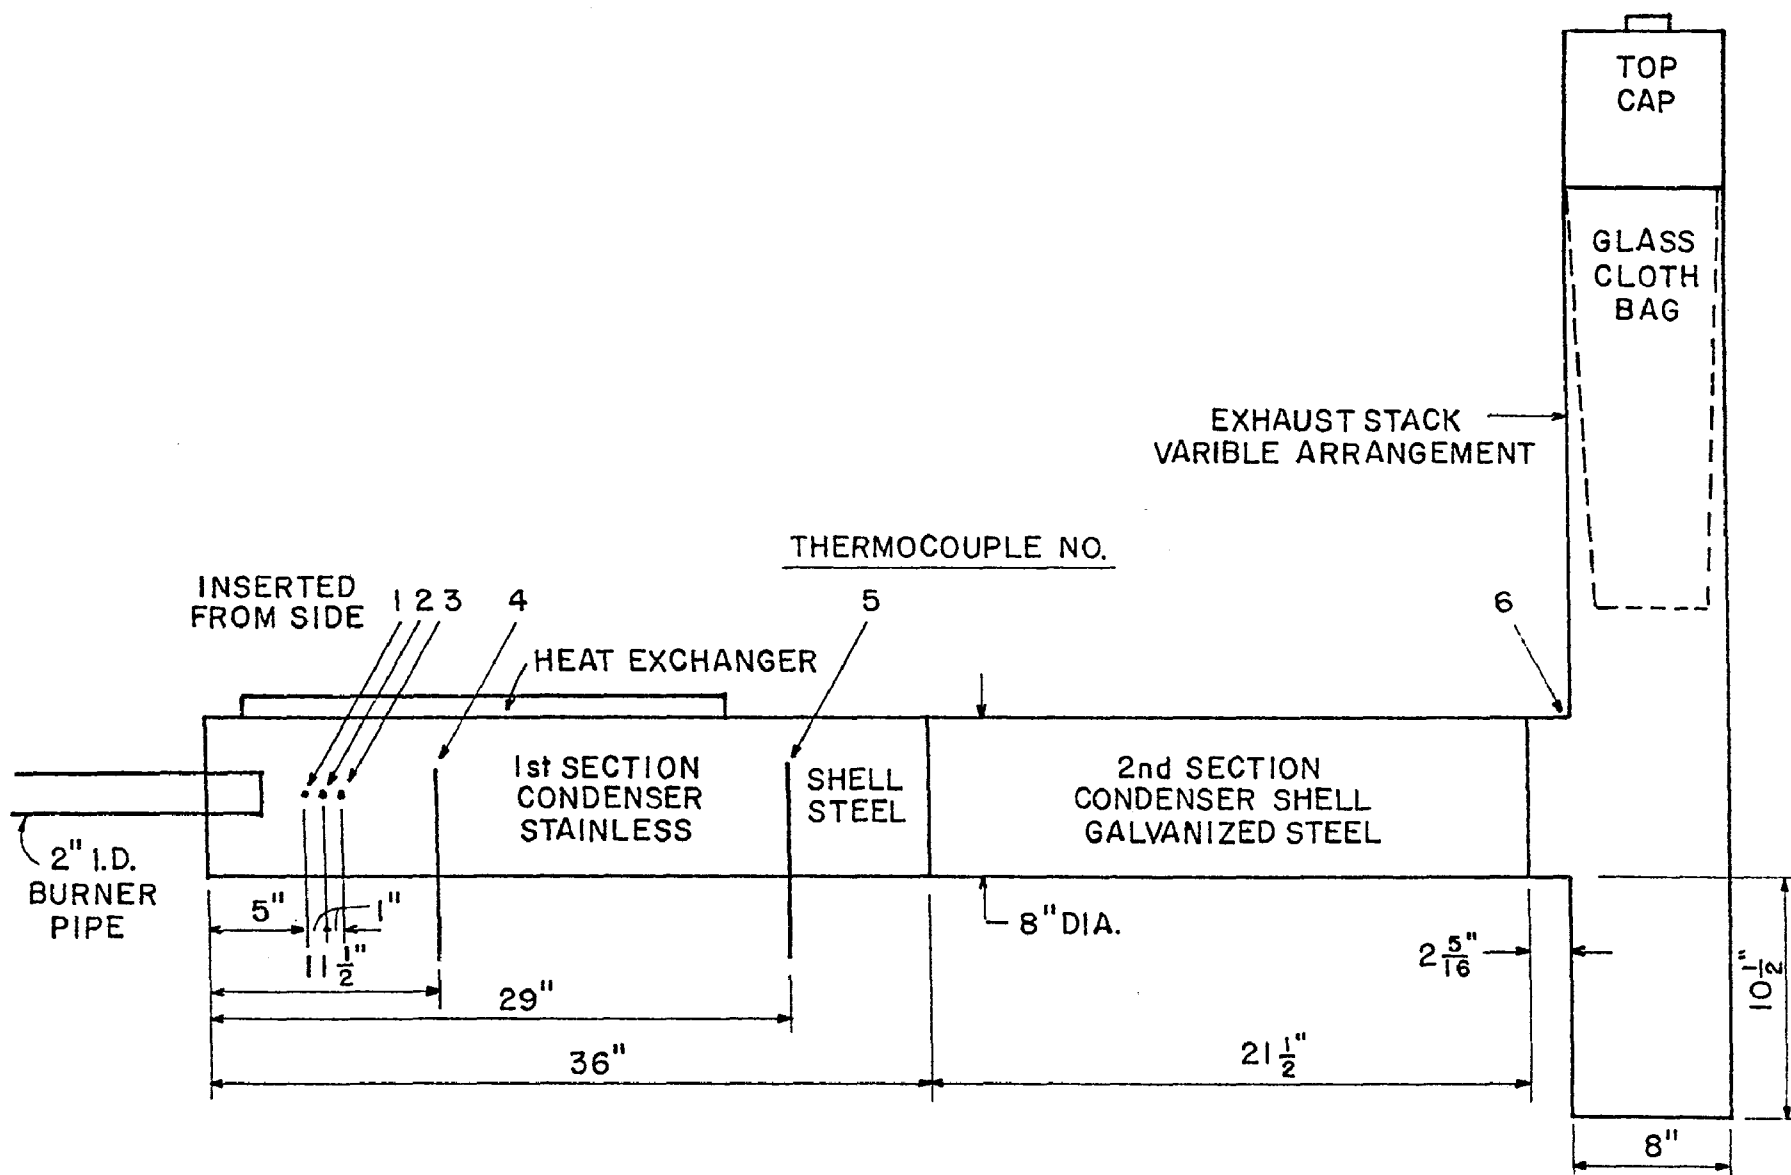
FLAME SPRAY DUST COLLECTION ASSEMBLY
